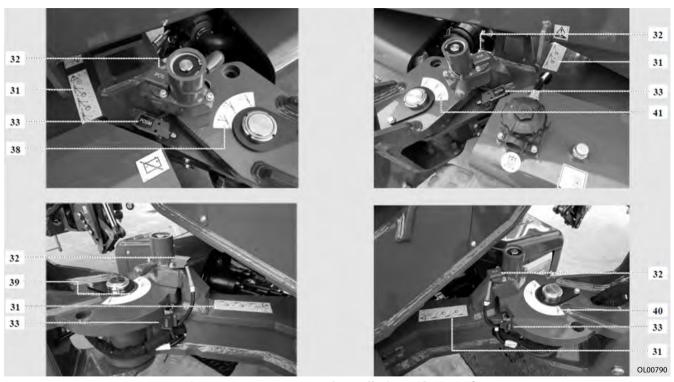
X33JP - Decal Installation - Sheet 5 of 10
